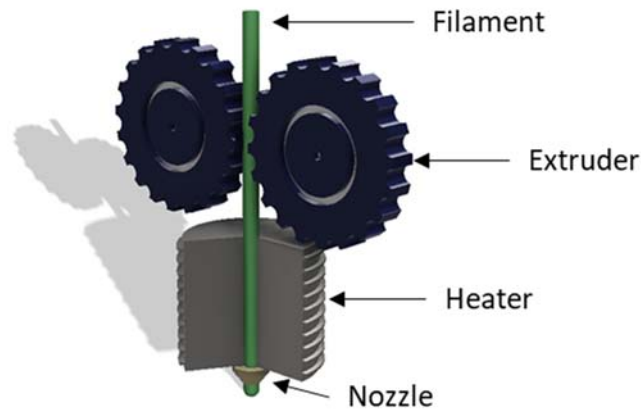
Scheme of the fused filament fabrication printing head containing extruder and heater.
